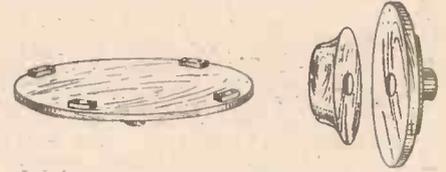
(left).—Locating pieces glued to faceplate for re-chucking.
